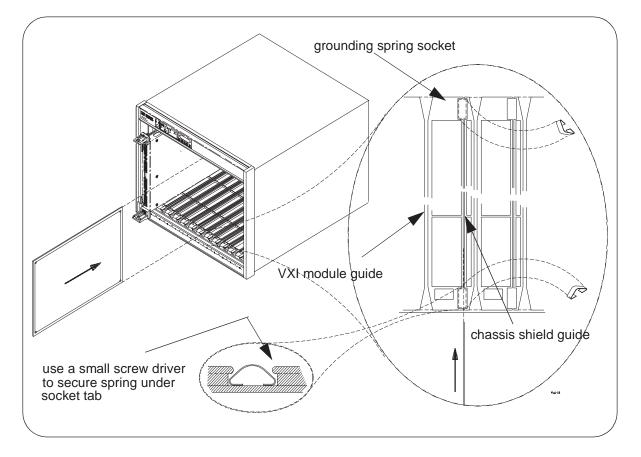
Installing the Grounding Springs and Chassis Shield.
